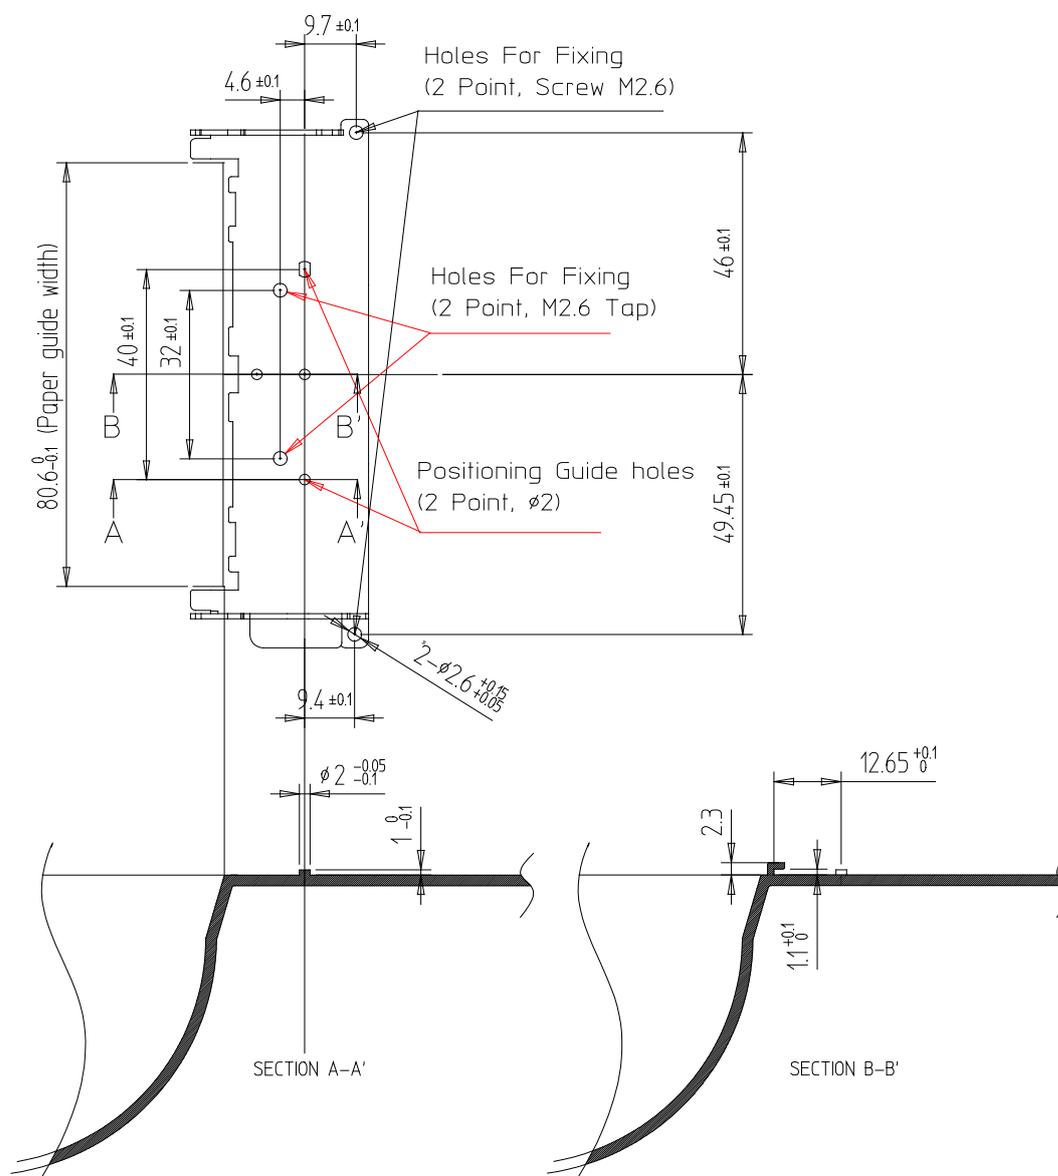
Position holes and boss dimension for mounting the mechanism
